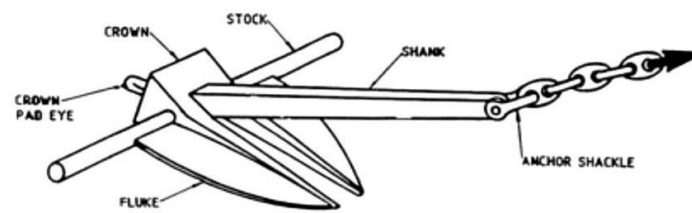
Example of a drag anchor that could be used with Spar LiftWEC
